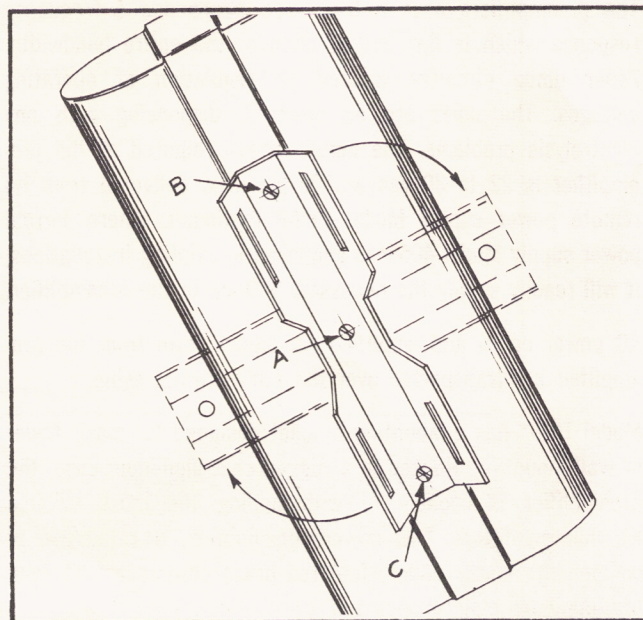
Inverting and Pivoting Bracket for Wall Mount
